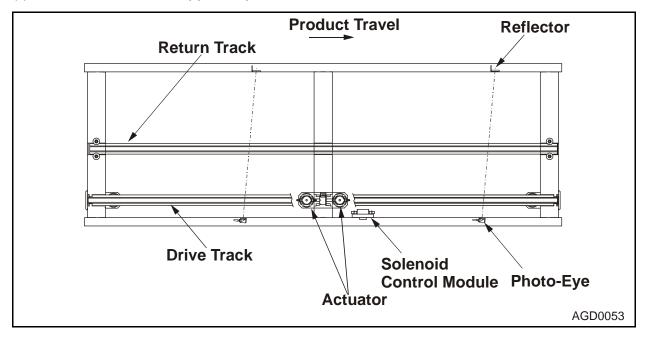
3 Intermediate Straight Section (RH Assembly Shown)
